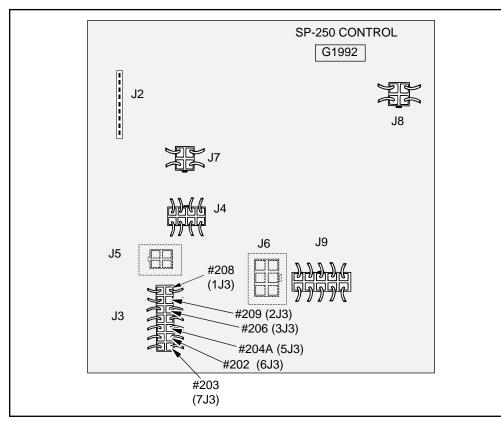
B - G1992 (Code 9402 Only) Control PC Board Main Transformer Test Points. Note: Plugs J5 and J6 are on inboard non-component side of Control Board.
